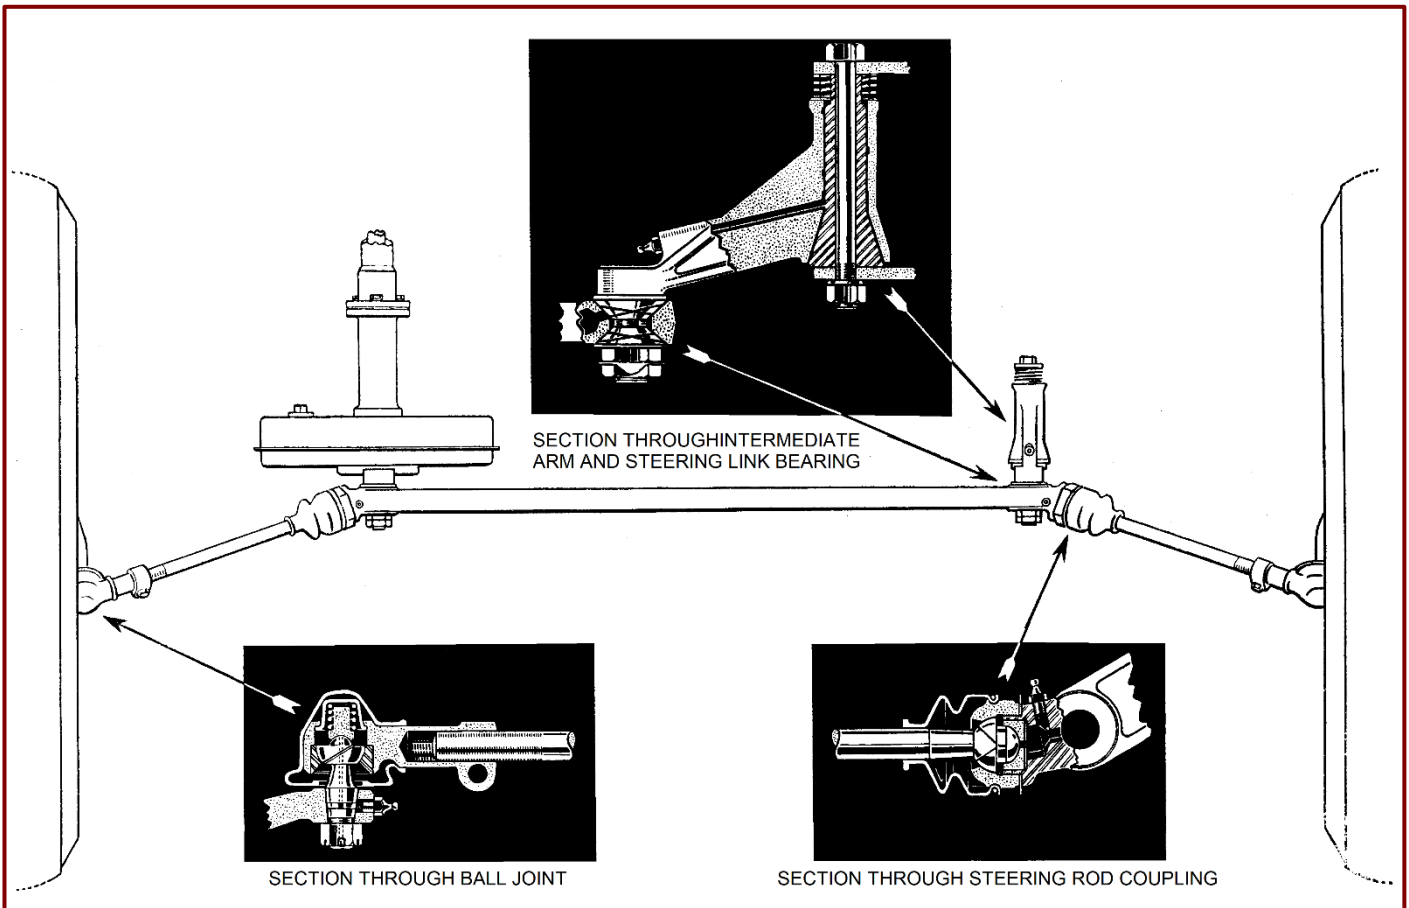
Steering (Old type ball joint, new type illustrated below, Figure 65).
